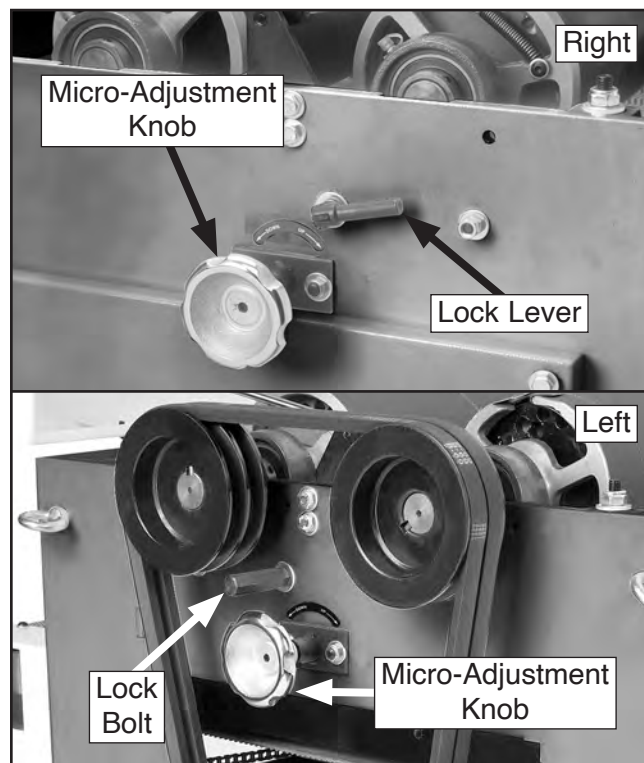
Location of rear sanding drum micro-adjustment knobs and locks.
